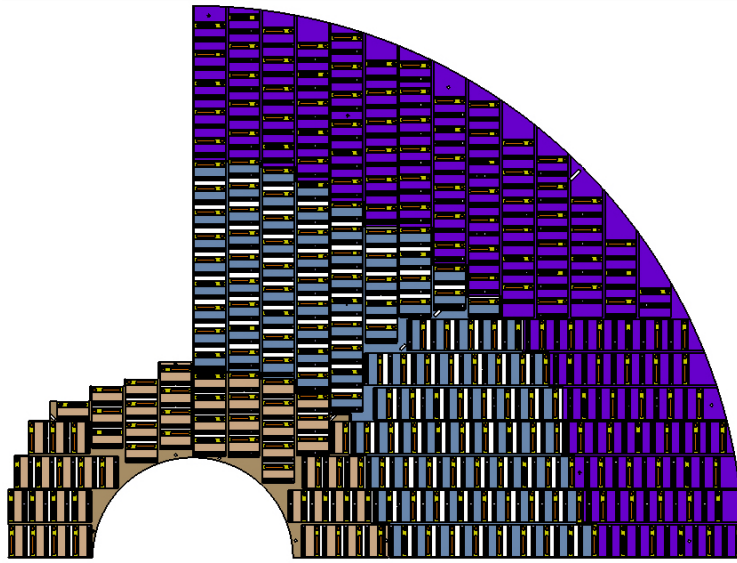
Detector units with modules assembled on the inner, middle and outer support plates
